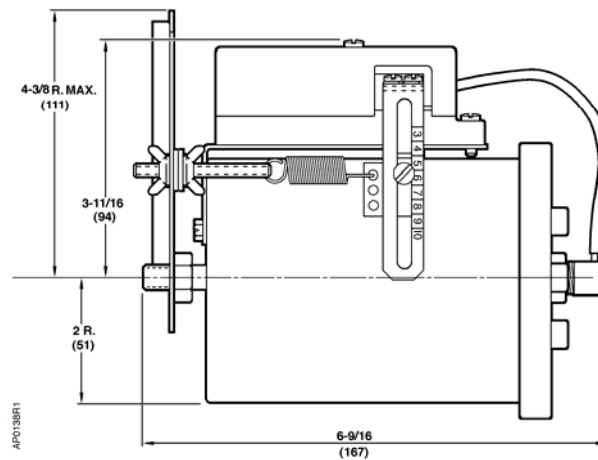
No. 3 Actuator with the RL 147 Positioning Relay Mounted Dimensions. Dimensions in Inches (Millimeters).
